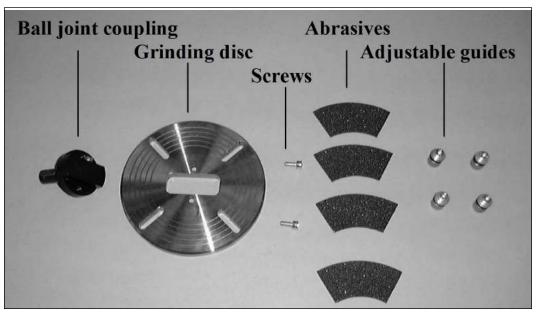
TOOL COMPONENTS FOR GRINDING DISCS WITH ADJUSTABLE GUIDES
